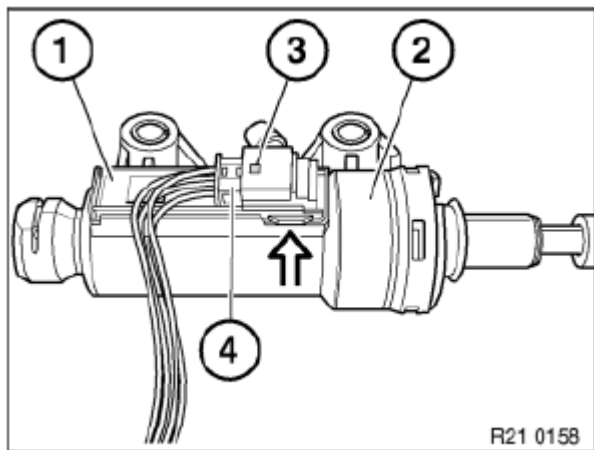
Identifying Shift Element From Clutch Master Cylinder
